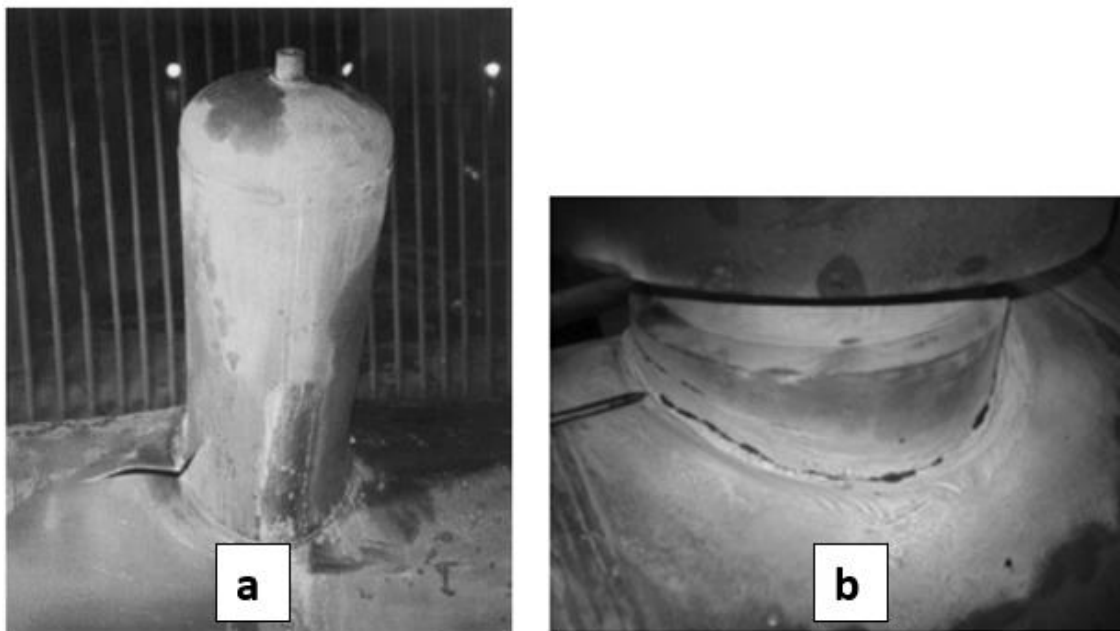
3 a) perpendicular crack on nozzle -cylinder connections [87] and b) transverse cracks on the weld on nozzle -cylinder connections [88]
